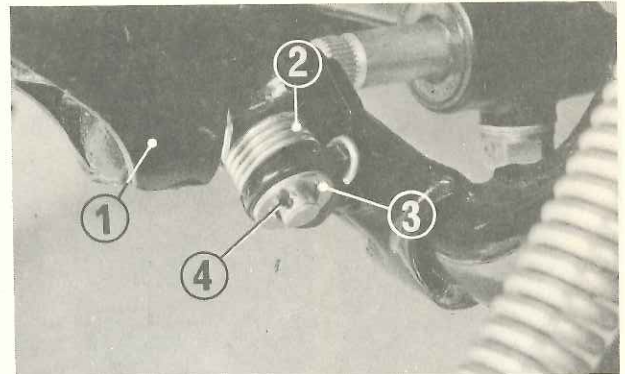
(1) Step arm (2) Step return spring (3) 8 mm plain washer (4) 1.6 mm split pin
